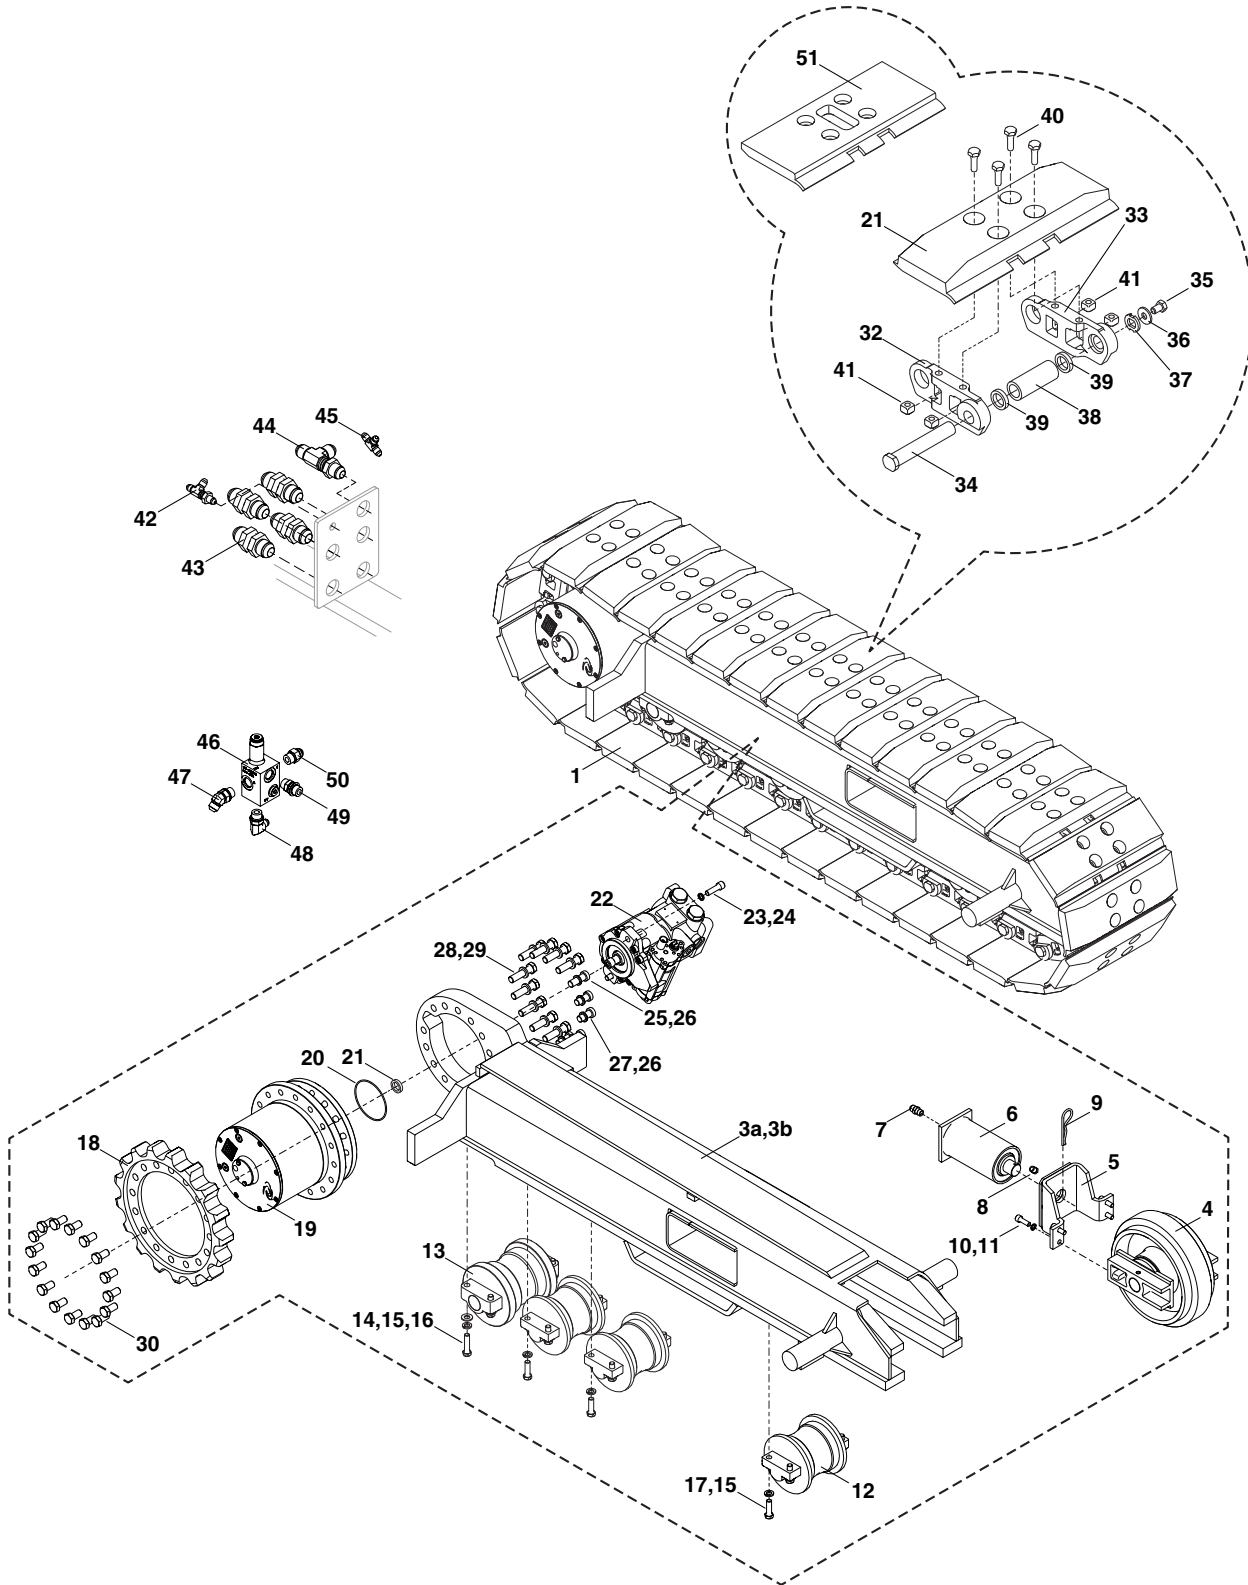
Track Assembly - Poly Pads/Cast Steel (1 of 2)
